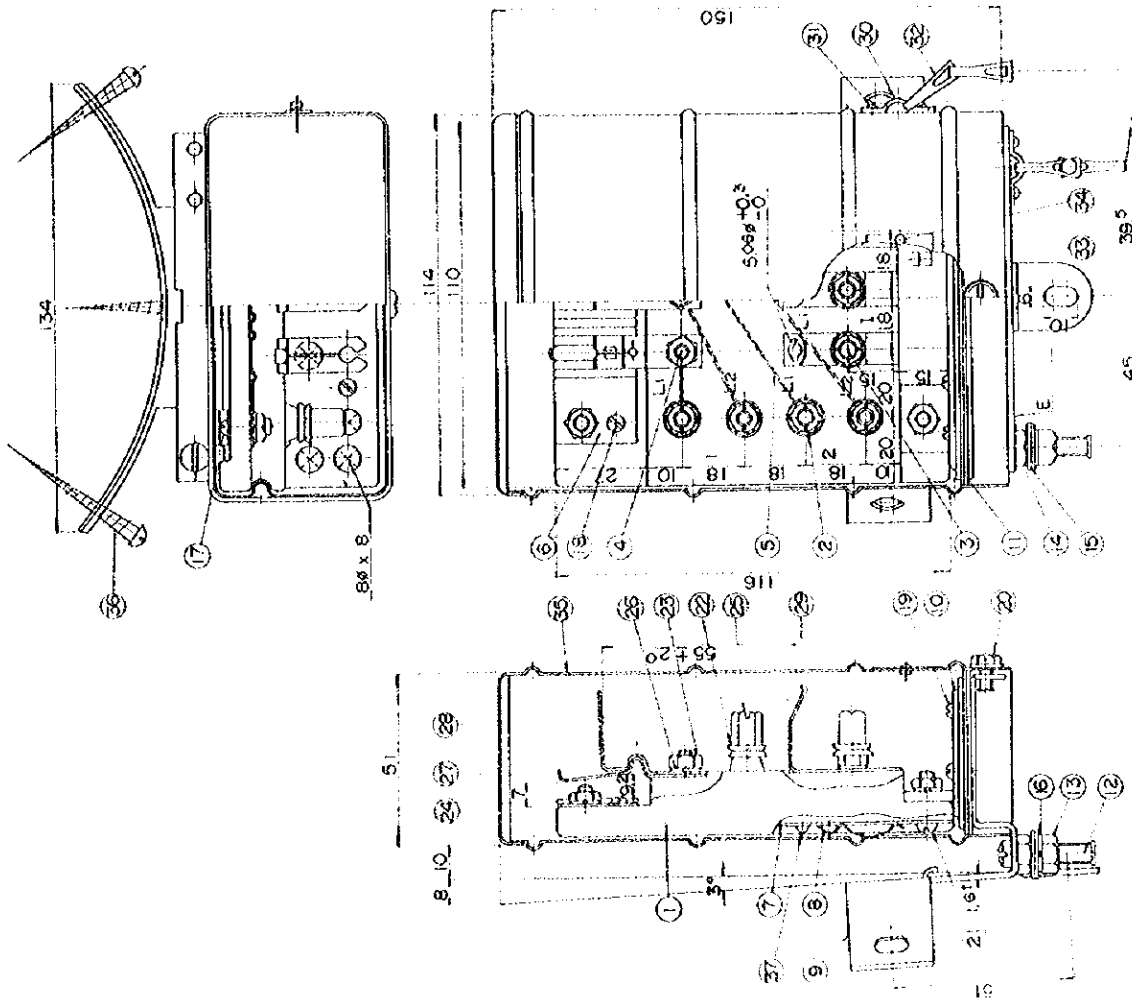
2 Pole Pole Mounted Protector
